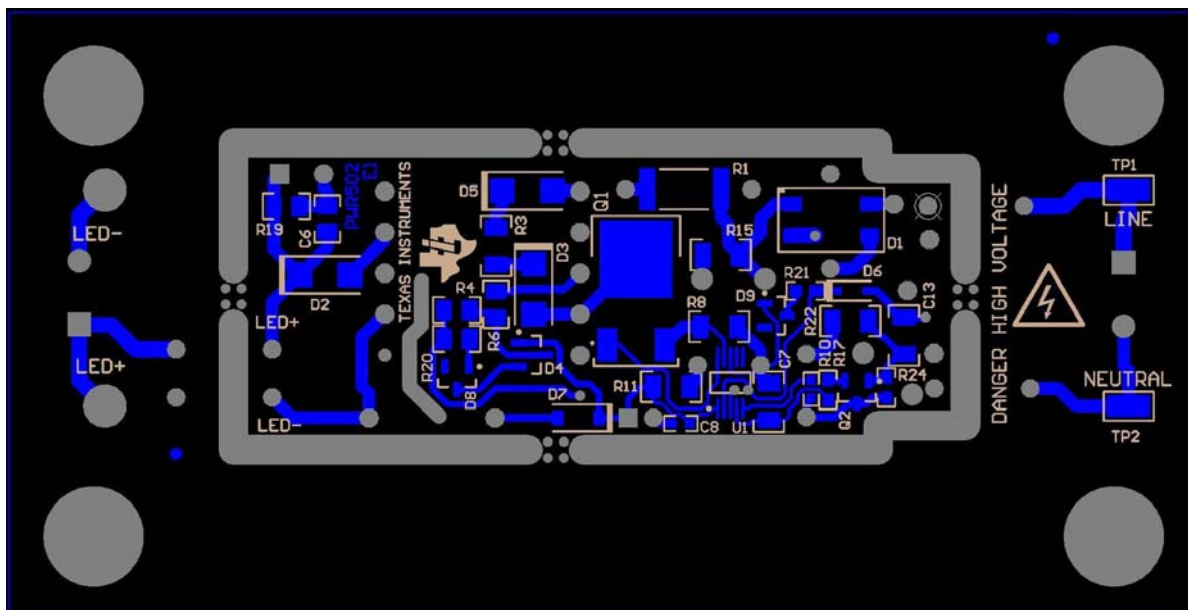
Bottom Layer and Bottom Overlay (Bottom view)
